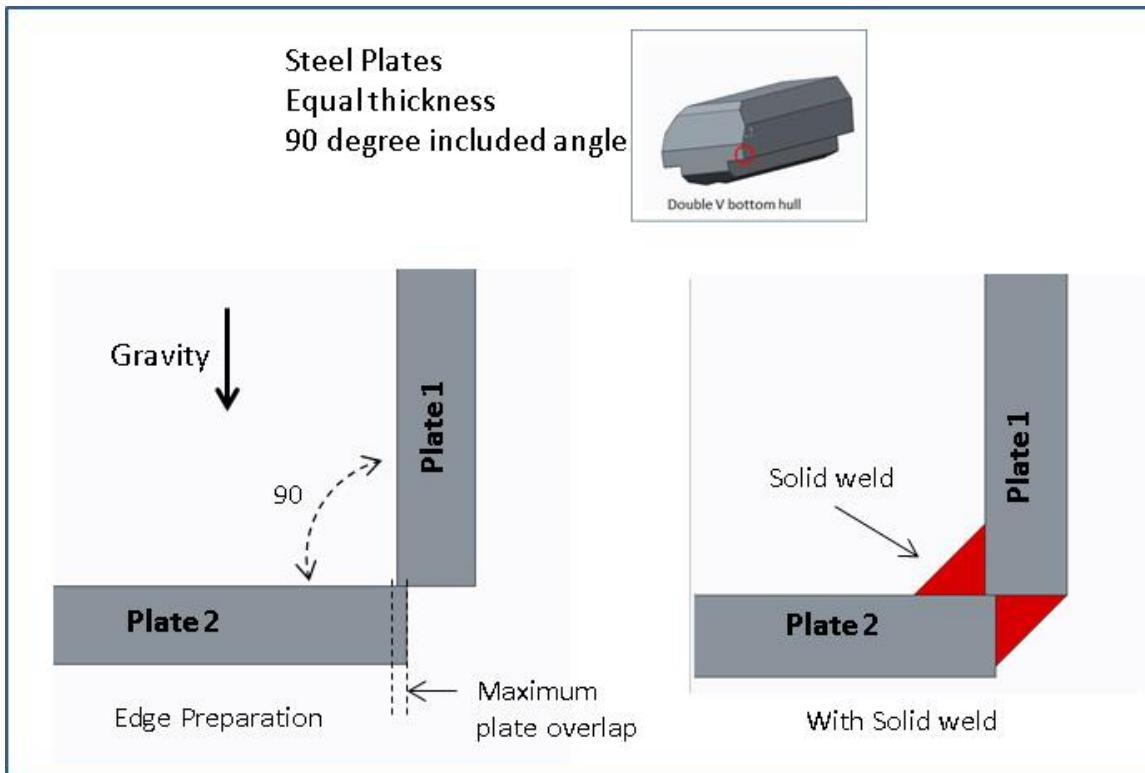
Edge Prep and Solid Weld Example 1
